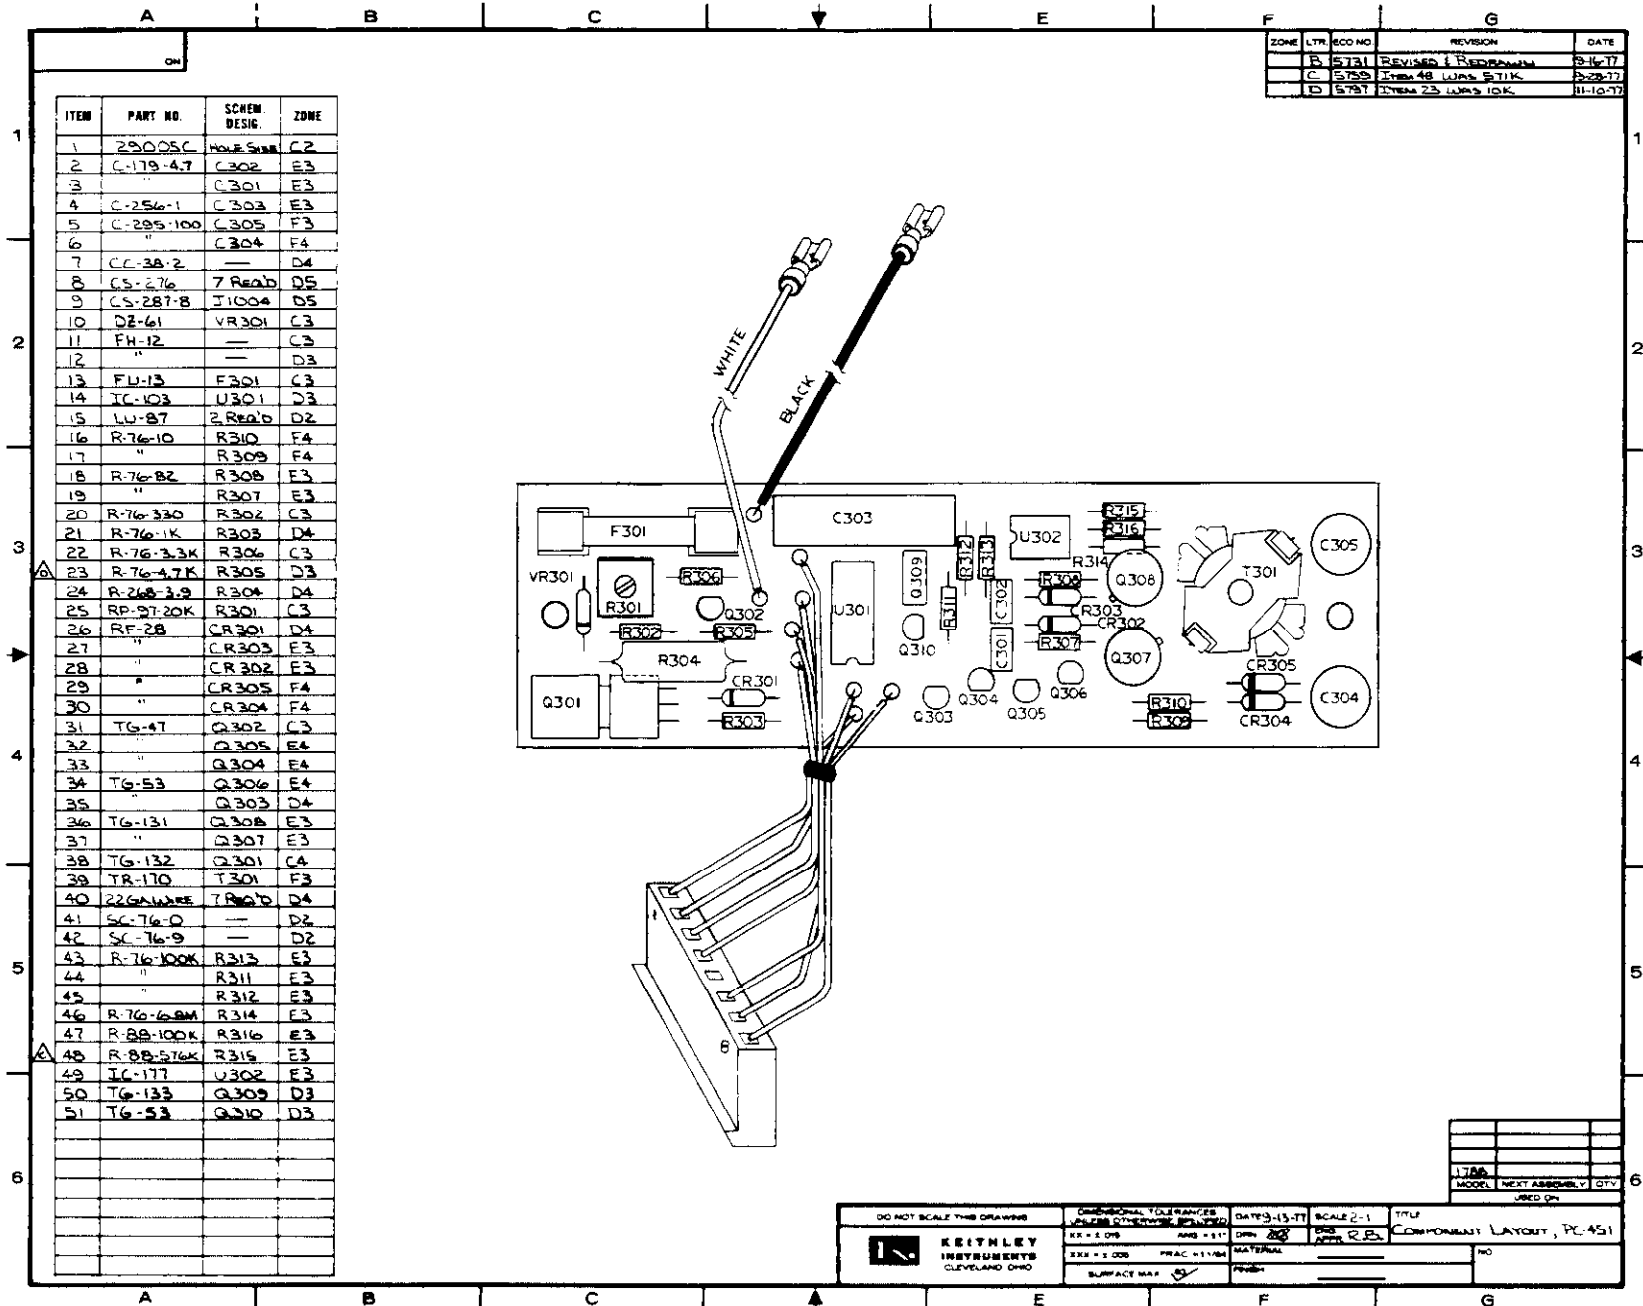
Component Layout, PC-451, Battery Pack Board.
